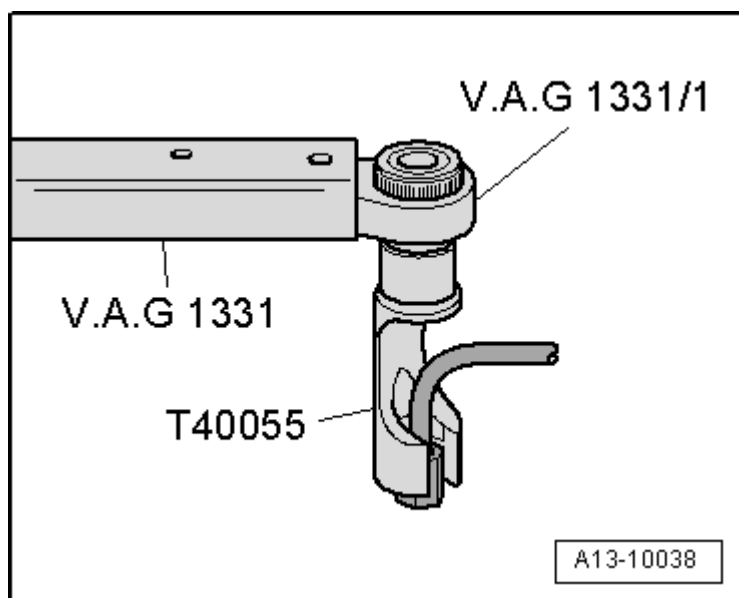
Identifying Torque Wrench V.A.G 1331T, Reversible V.A.G 1331/1 And Socket T40055
